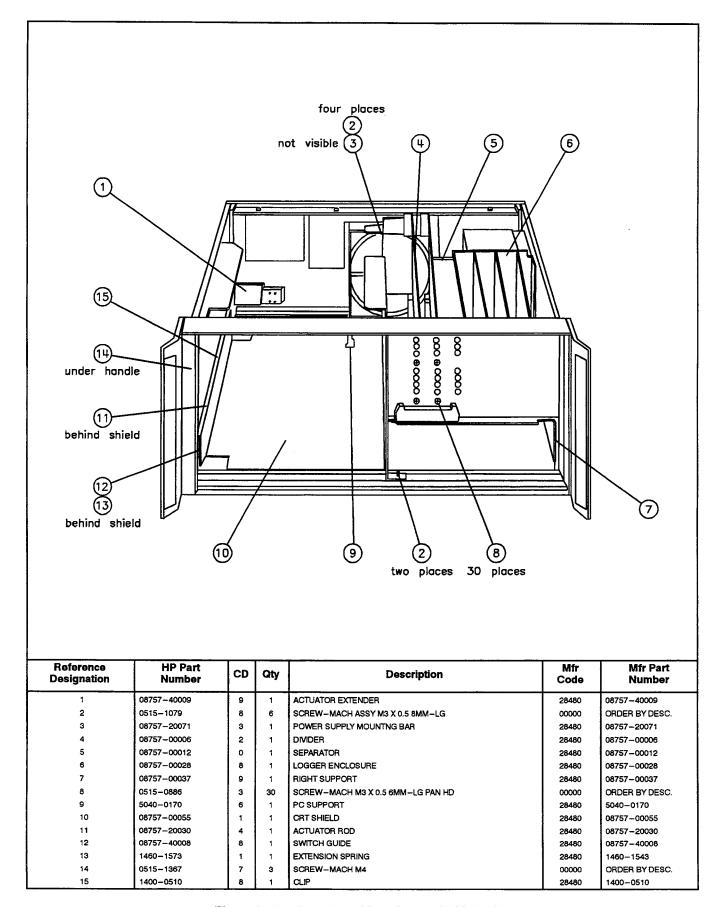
Cage Assembly and CRT Shield (8 of 9)
